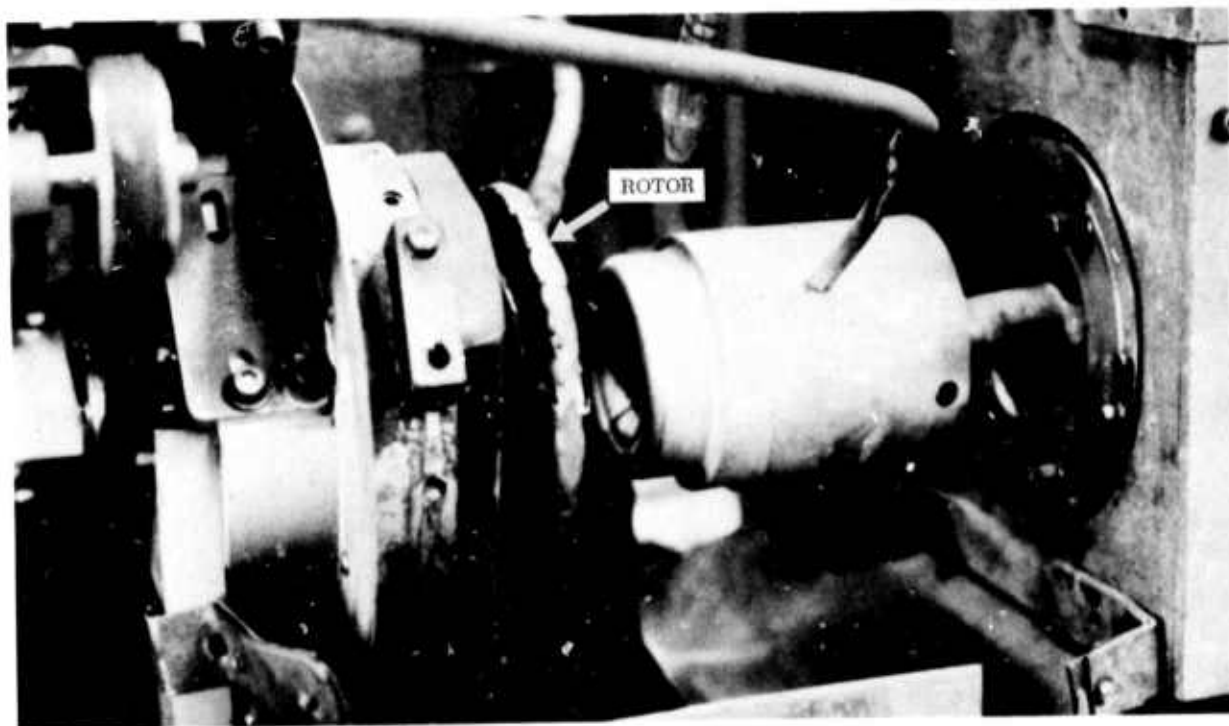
Silicon Nitride Rotor Mounted in Ultrasonic Grinding Machine
